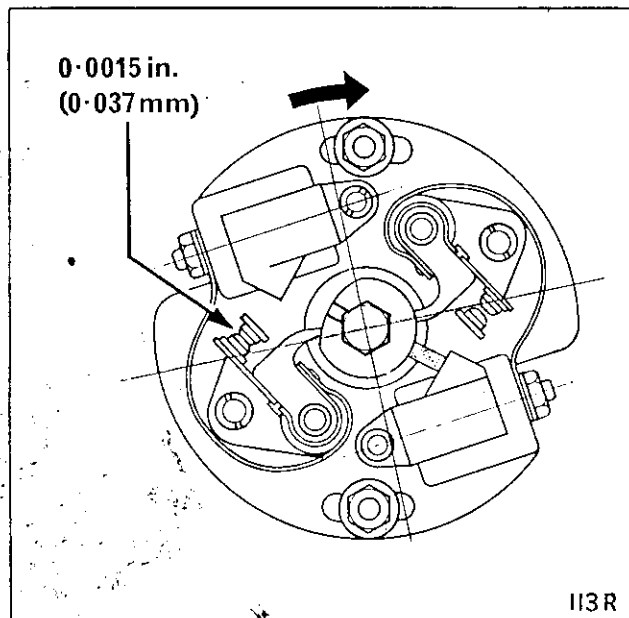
(a). Contact breaker points just opening on the right cylinder. With the engine set at the correct STATIC SETTING, the C.B. back plate assembly should be adjusted in the slots, to a position where the C.B. points just commence to open.
